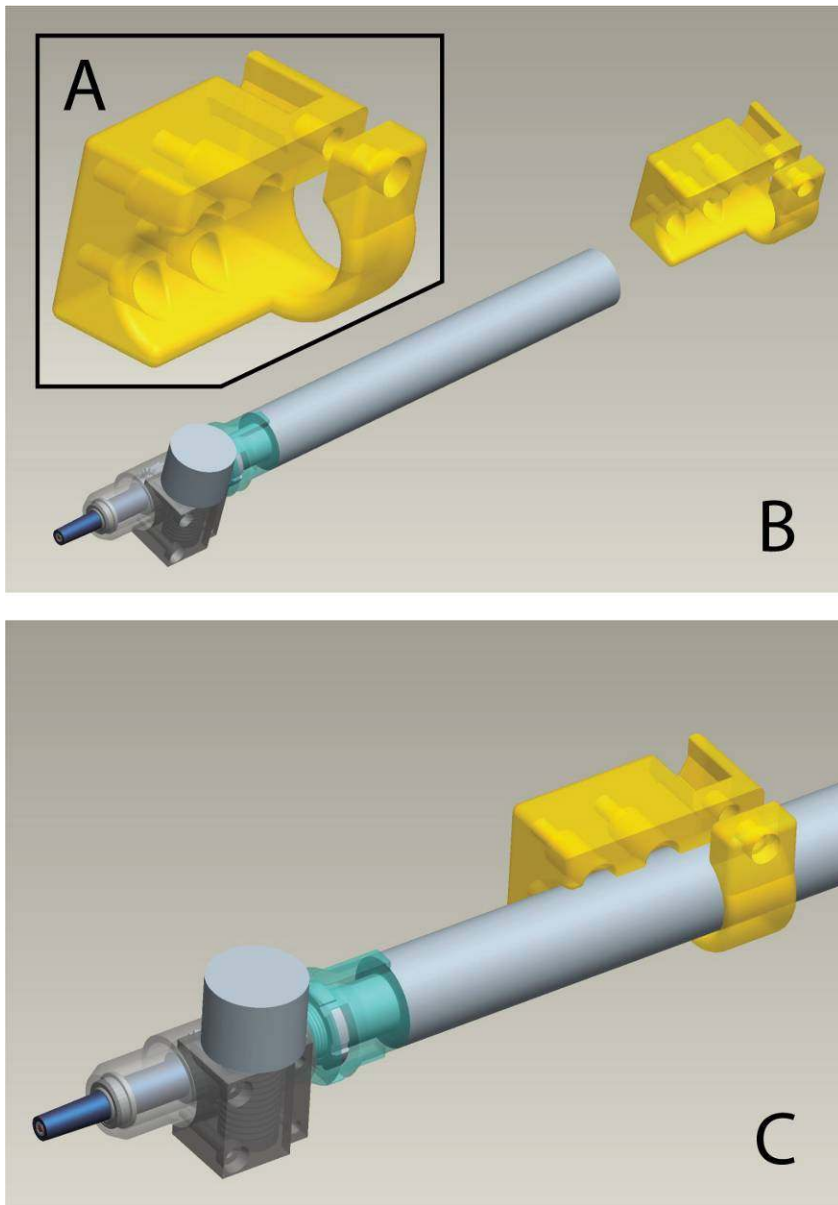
Schematic of a custom-built mounting bracket to attach the linear actuator to the manual 6-axis positioning stage. (A) This mounting bracket has a bolt-and-nut tightening clamp to secure the linear actuator column, and through-holes where bolts are used to mount the bracket to the chuck of the positioning stage. (B, C) The electrical signal and power cable is inserted through the opening in the clamp, and the bracket is slid over the column of the linear actuator. This bracket allows for coarse forward and backward positioning, and for axial rotation of the linear actuator and controller.
